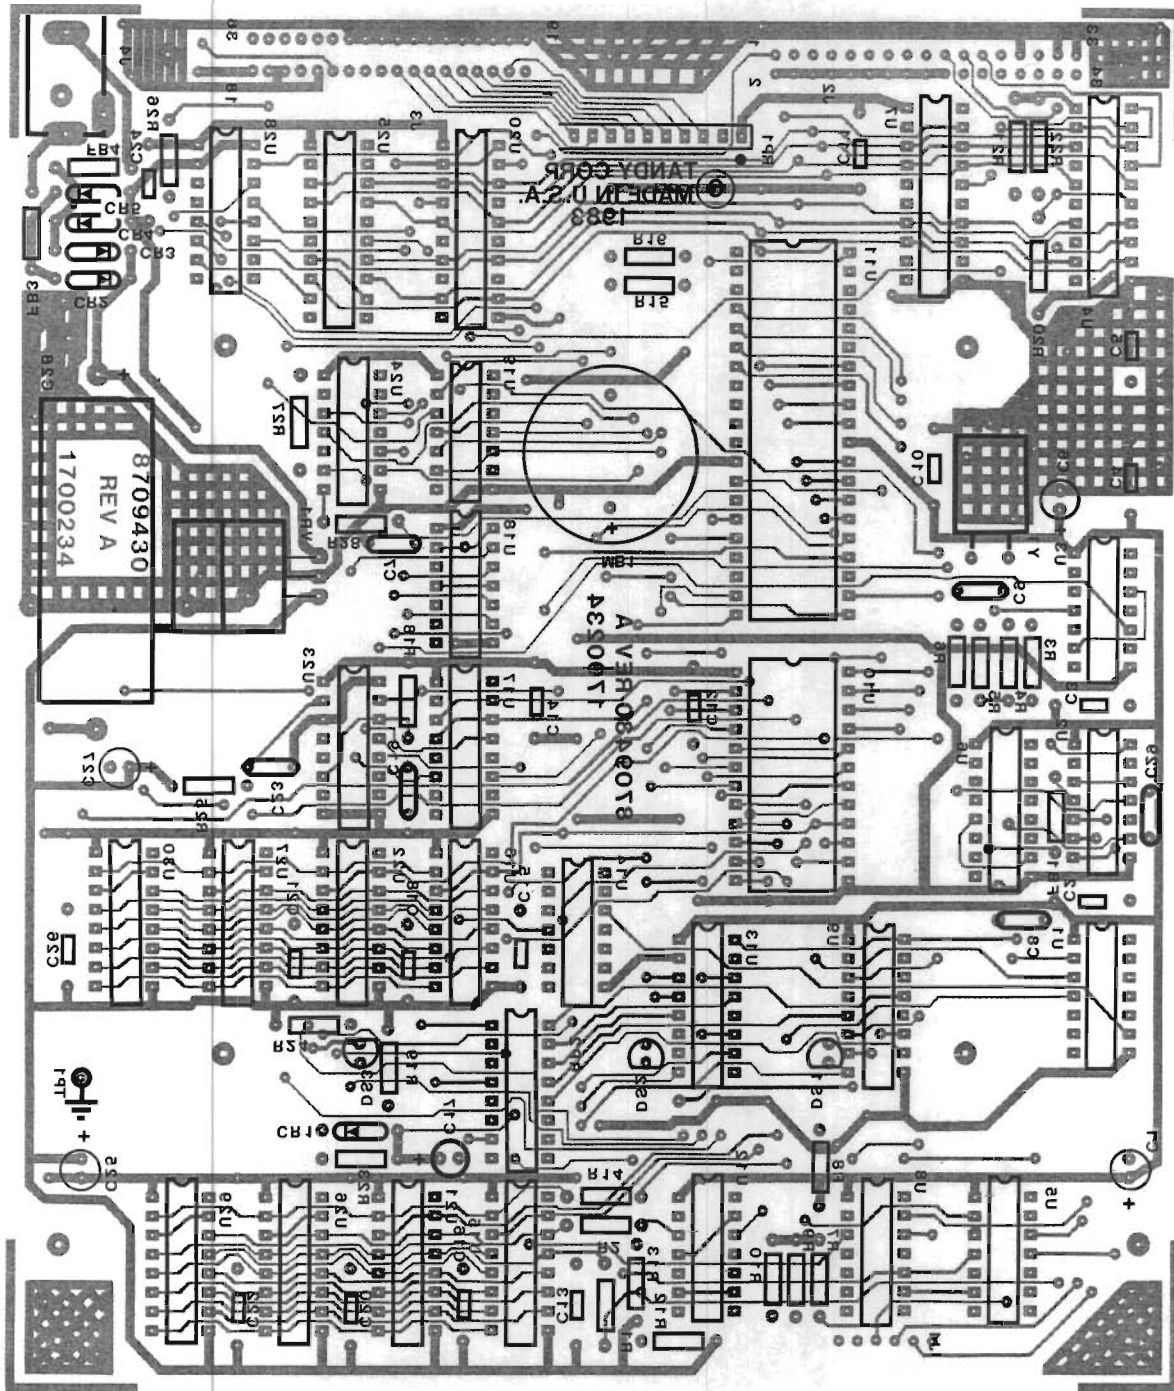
Circuit Trace, PCB Assembly 8851269 Solder Side
